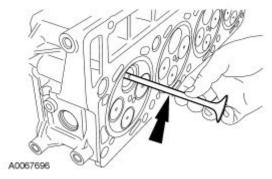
Removing Valve Courtesy of FORD MOTOR CO.
